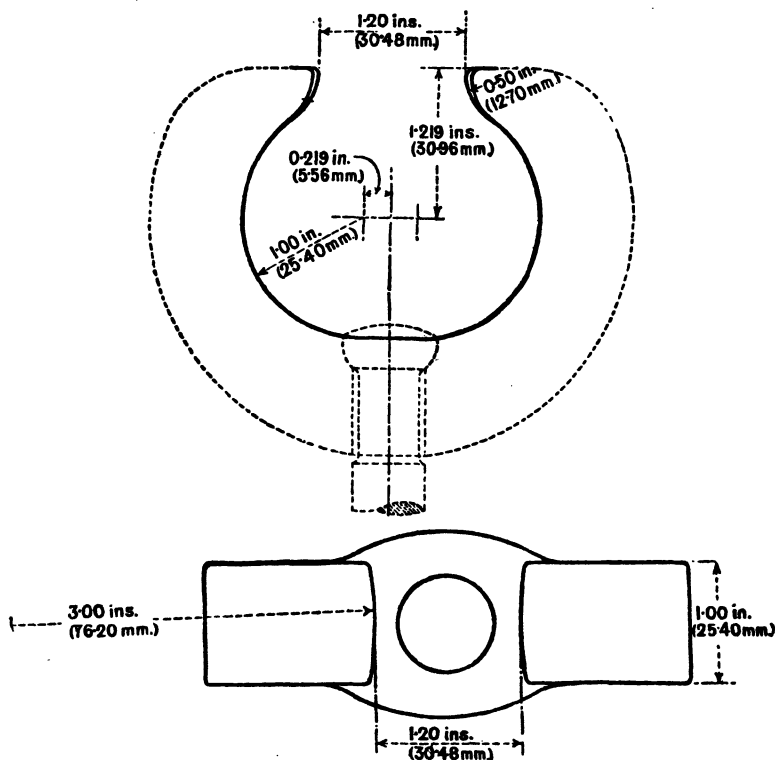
Standard Jaws for Tensile Testing Machine.
